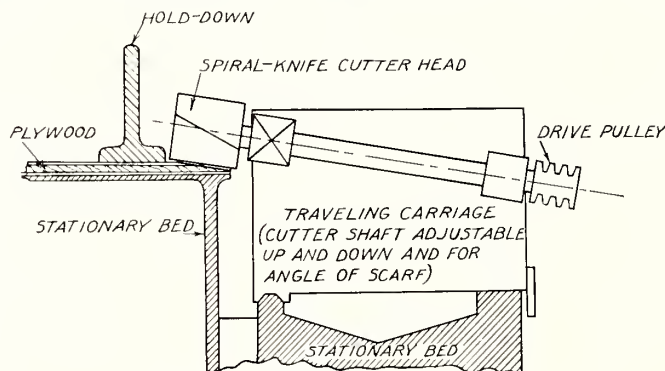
Traveling cutter-head scarfing machine.
